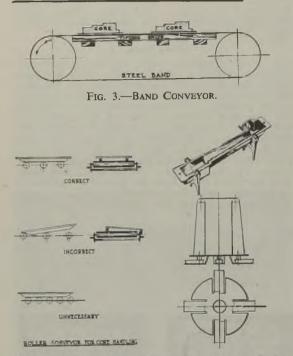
ROLLER CONVEYOR. FIG. 5.-CORE CARRIERS.
